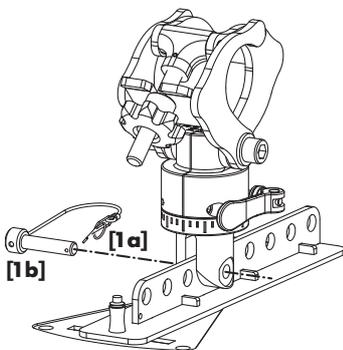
Z5147 Rota Clamp assembly with Z5156 Q Flying adapter
